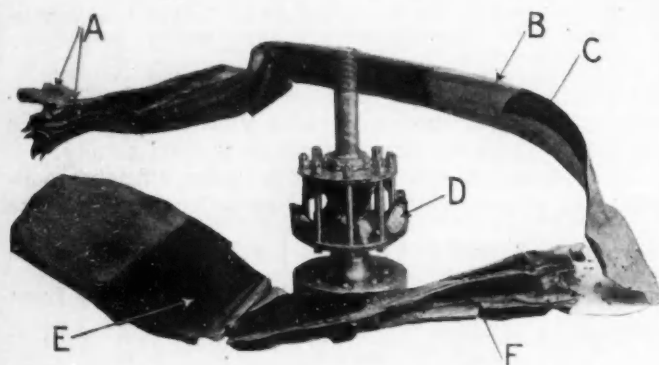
PARTS OF PROPELLER SHOWN IN FIG. 7
